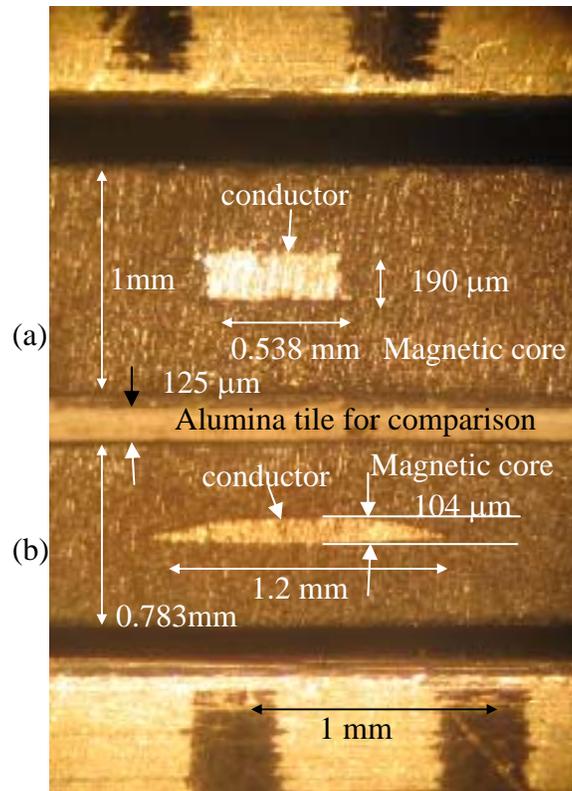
Cross-sectional view of LTCC inductors with (a) rectangular and (b) almond cross-sectional shape.
